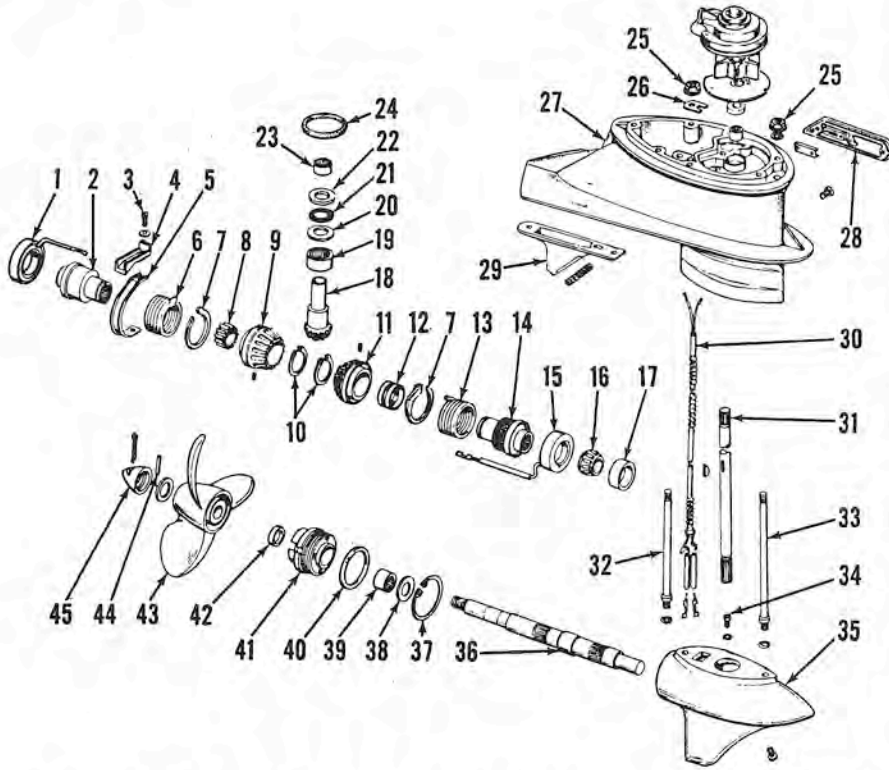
Exploded view of gearcase and associated parts used on ELECTRAMATIC models.
